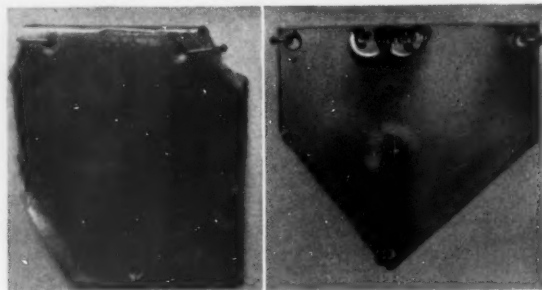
Samples of aluminium plated by the process developed by the B.N.F. Laboratory. Left, D.T.D.424 welded to commercial grade aluminium; right, aluminium with a copper rivet in the centre
